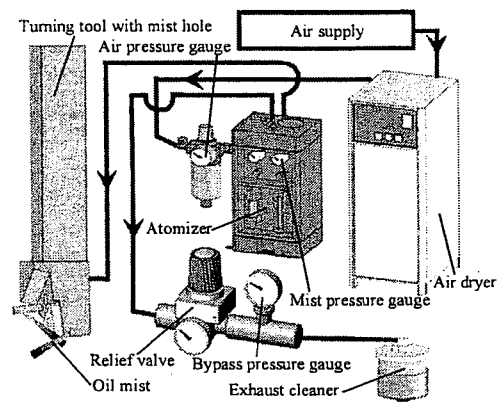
Generating system of oil mist connected to turning tool holder with oil hole
